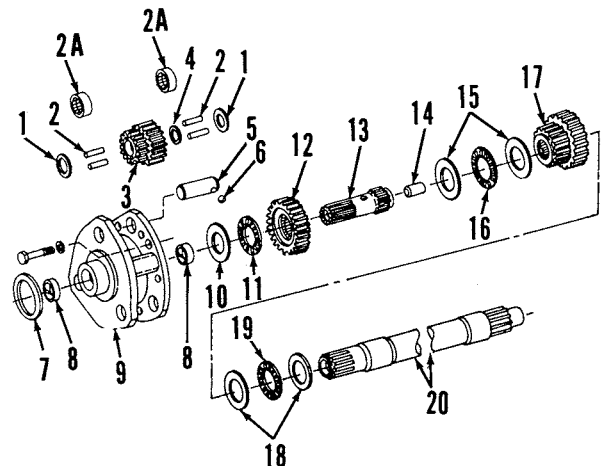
Exploded view of two-speed planetary unit. Needle bearing assemblies (2A) were used on early models. On late models, there are two rows of 19 rollers (2) separated by a spacer (4).
